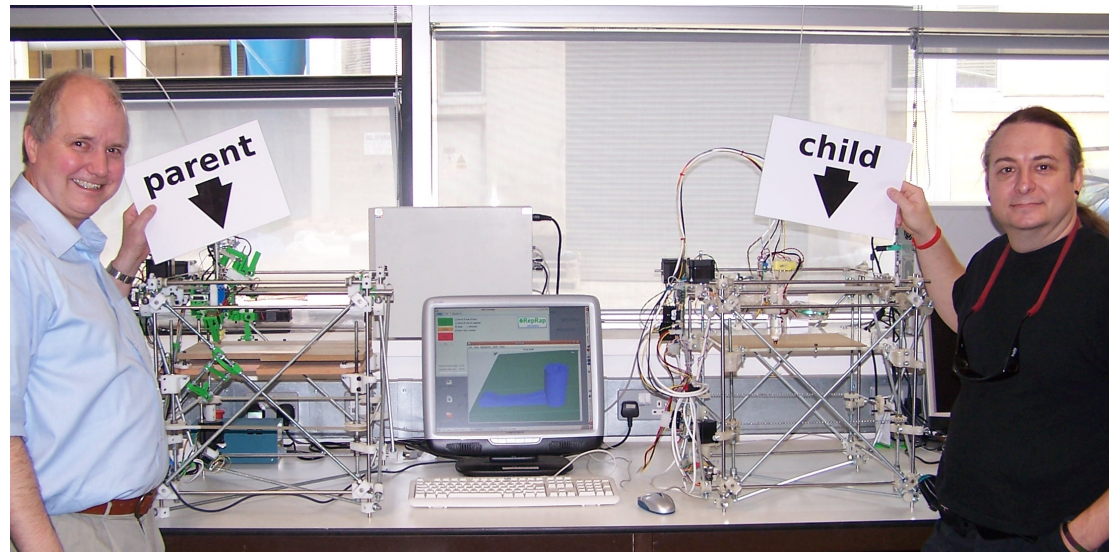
RepRap machine: this 3D printer can produce about the 70 percent of its constituent parts.
